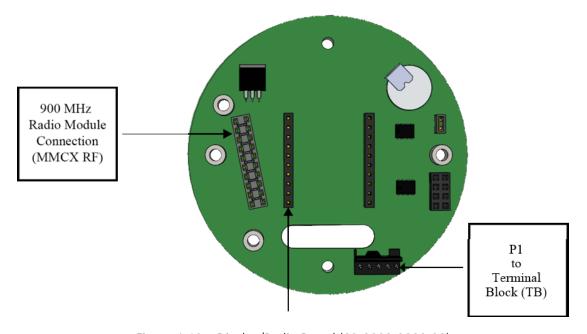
Display/Radio Board (83-8008-0000-00)
